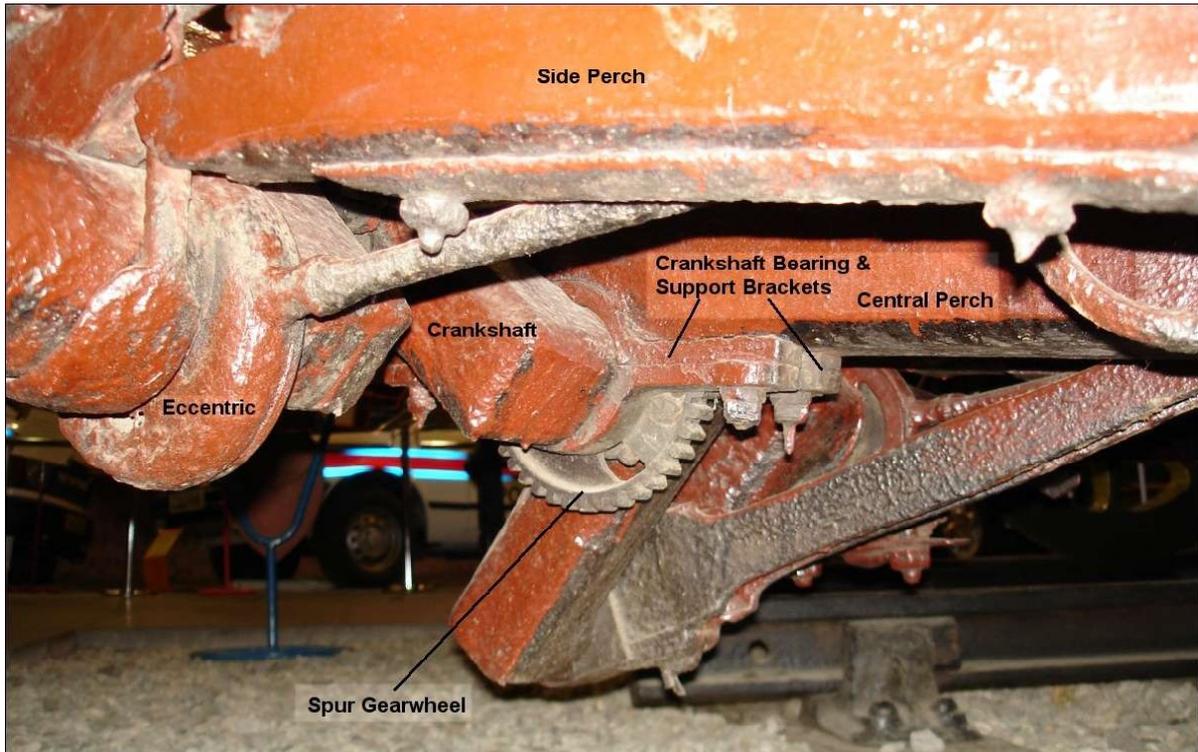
Gurney Drag, side view of the spur gearwheel from underneath.
